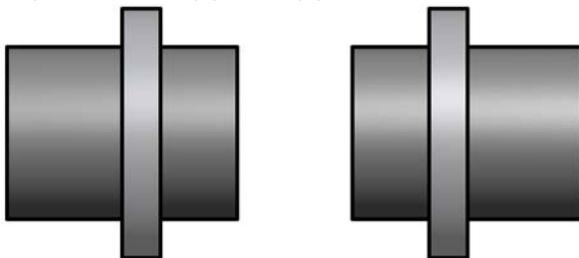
Place pipe ends in open fusion machine clamps
